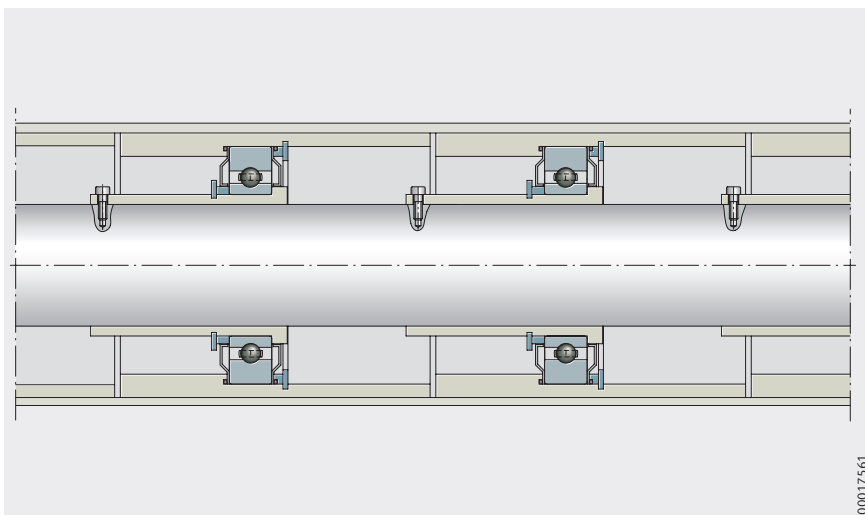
· Each individual tube segment is supported by a hybrid deep groove ball bearing
